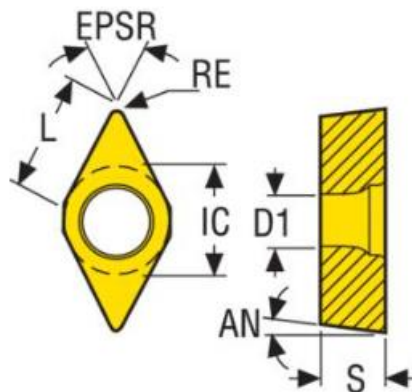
Geometric description of cutting tool inserts used in longitudinal turning tests.
